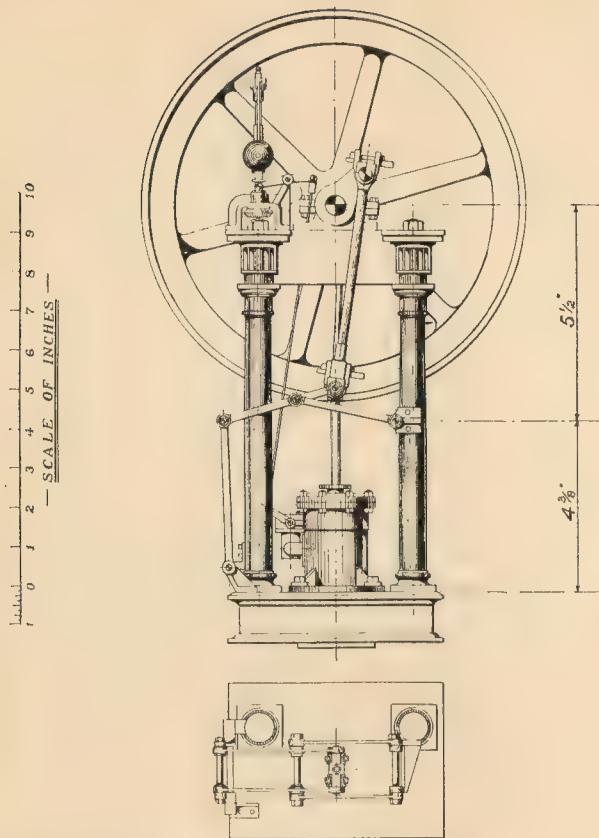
Side view and motion work plan of the double entablature engine with parallel motion crosshead
